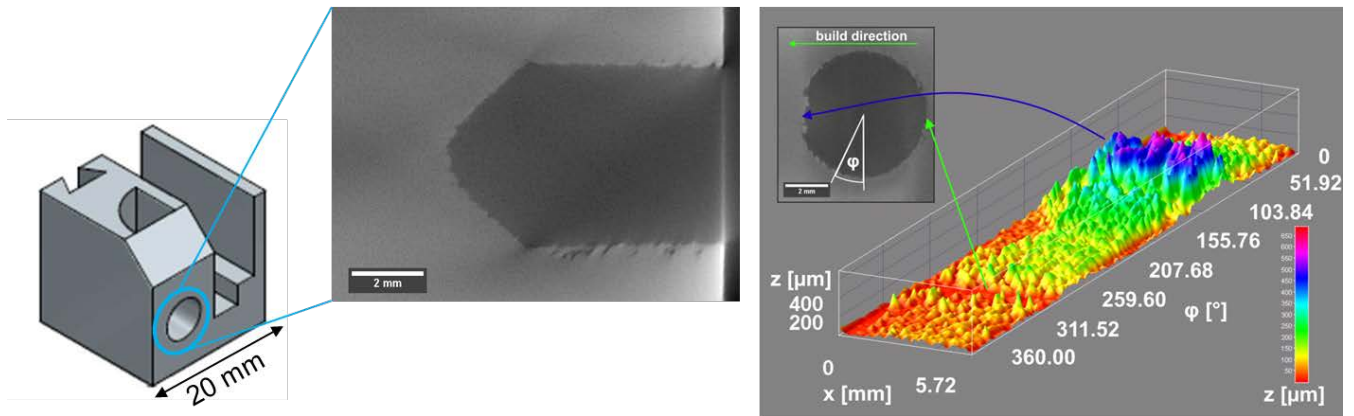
Roughness on the mantle surface of a printed cylindrical hole in a geometric test specimen
